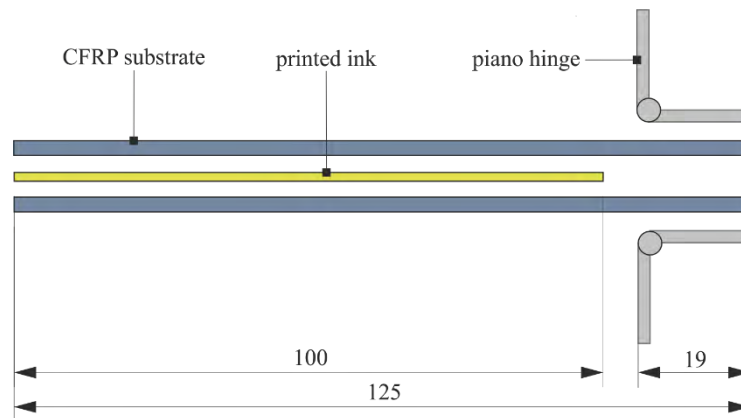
Exploded, schematic setup with the precrack on the right side for the DCB specimen in accordance with [12]. The ENF specimen in accordance with [13] is similar but without piano hinges. All measures are given in mm.
